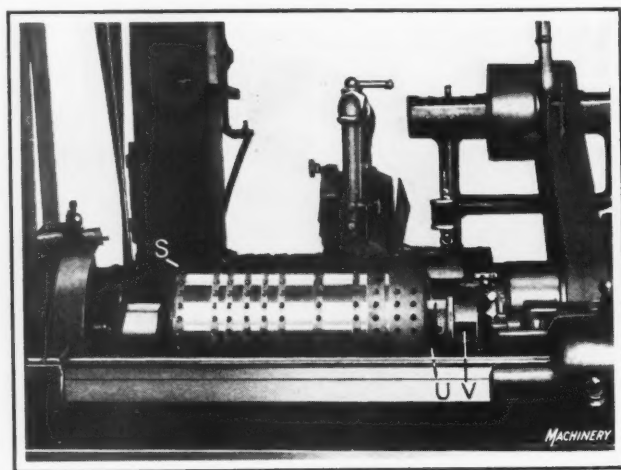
Set-up of the Drum in the Cylindrical Grinding Machine for grinding the Outside Surface
